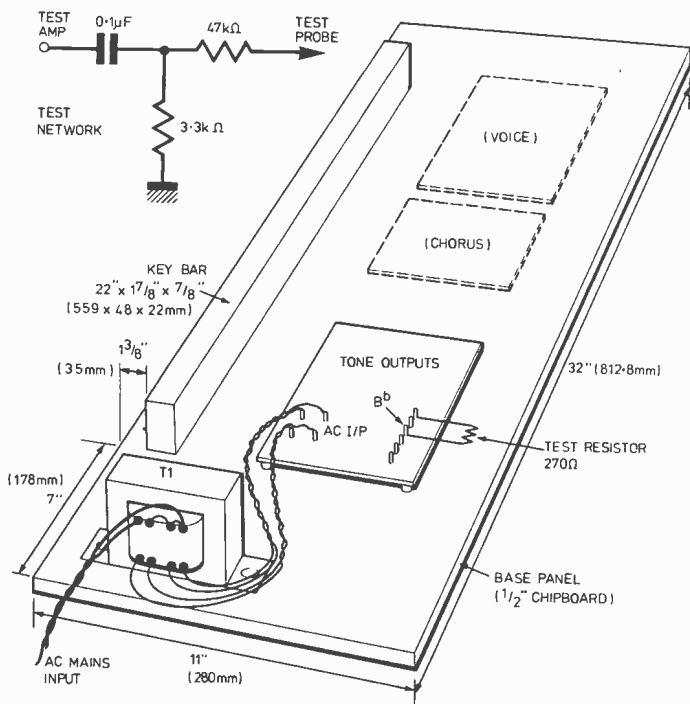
Mounting of P.S.U./Tone Generator components on base panel for initial test
